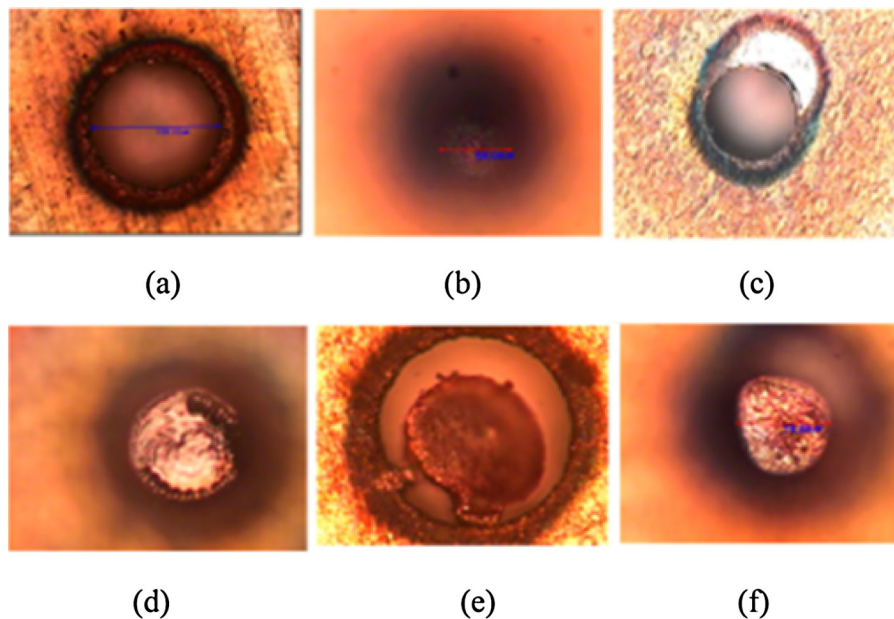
Classifications of defected via-holes. Camera is focused on the upper layer of FPCB. (a) Normal hole (b) Resin residue (c) Shifted (d) over processed (e) Missing hole (f) Eccentricity.
